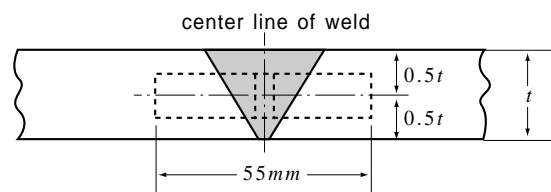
Position of Butt Weld Impact Test Specimen (Unit: mm, t : plate thickness)
